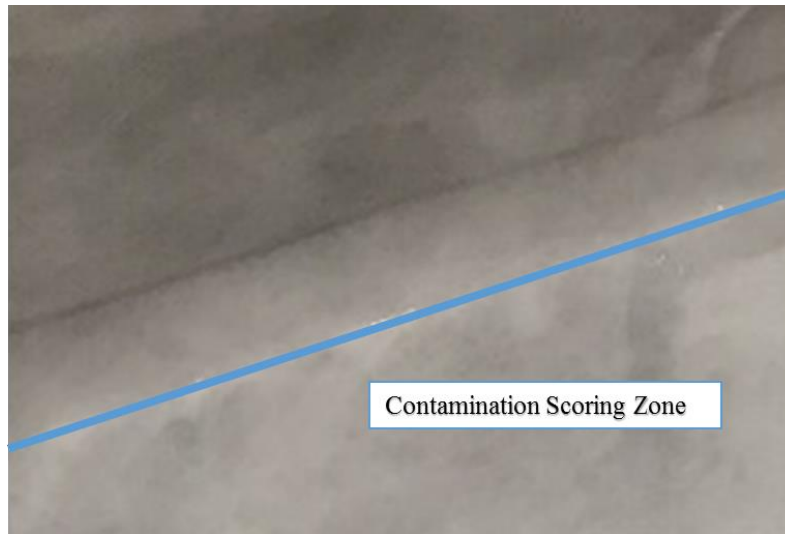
Contamination scoring zone. Note that the bolded line is on the "sterile side" of the seal. The other side of the seal is where text fixture clamps would peel the pouch open.
